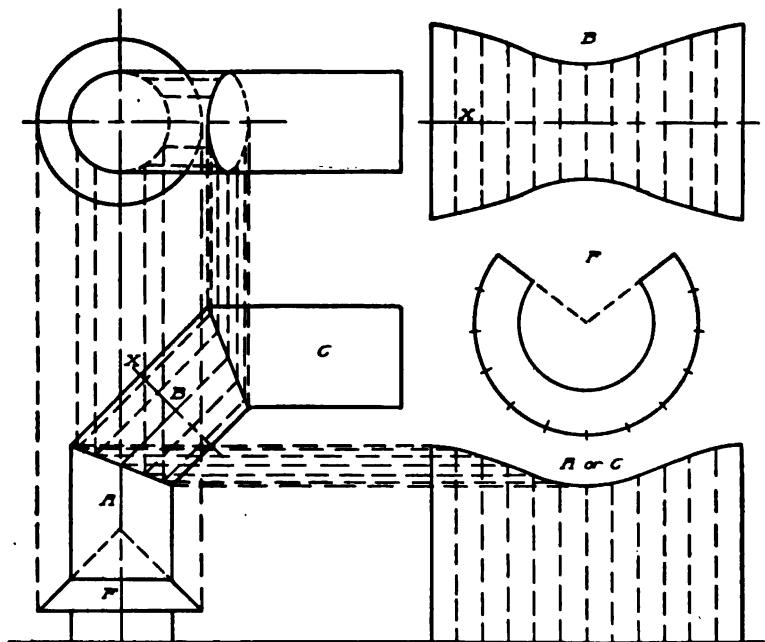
Plan, Elevation, and Development of Three-Piece Elbow and Collar
